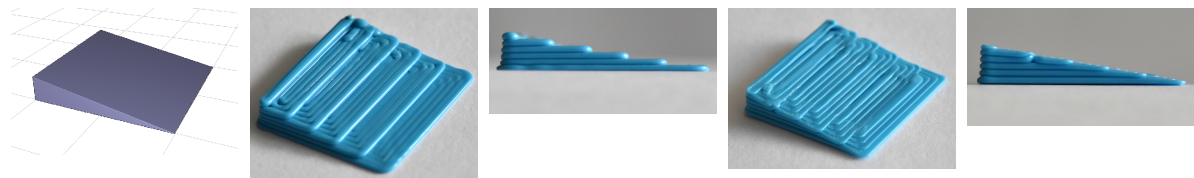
Printing a wedge model clearly reveals the staircase defects that plague 3D printing. (a) Input 3D model; the bottom edge length is 20mm and the angle of the incline plane is 10. (b) Global view and (c) side view of a standard, flat layer printed result. (d) Global view and (e) side view of our anti-aliased printed result, revealing the improvement in surface accuracy and silhouette smoothness
